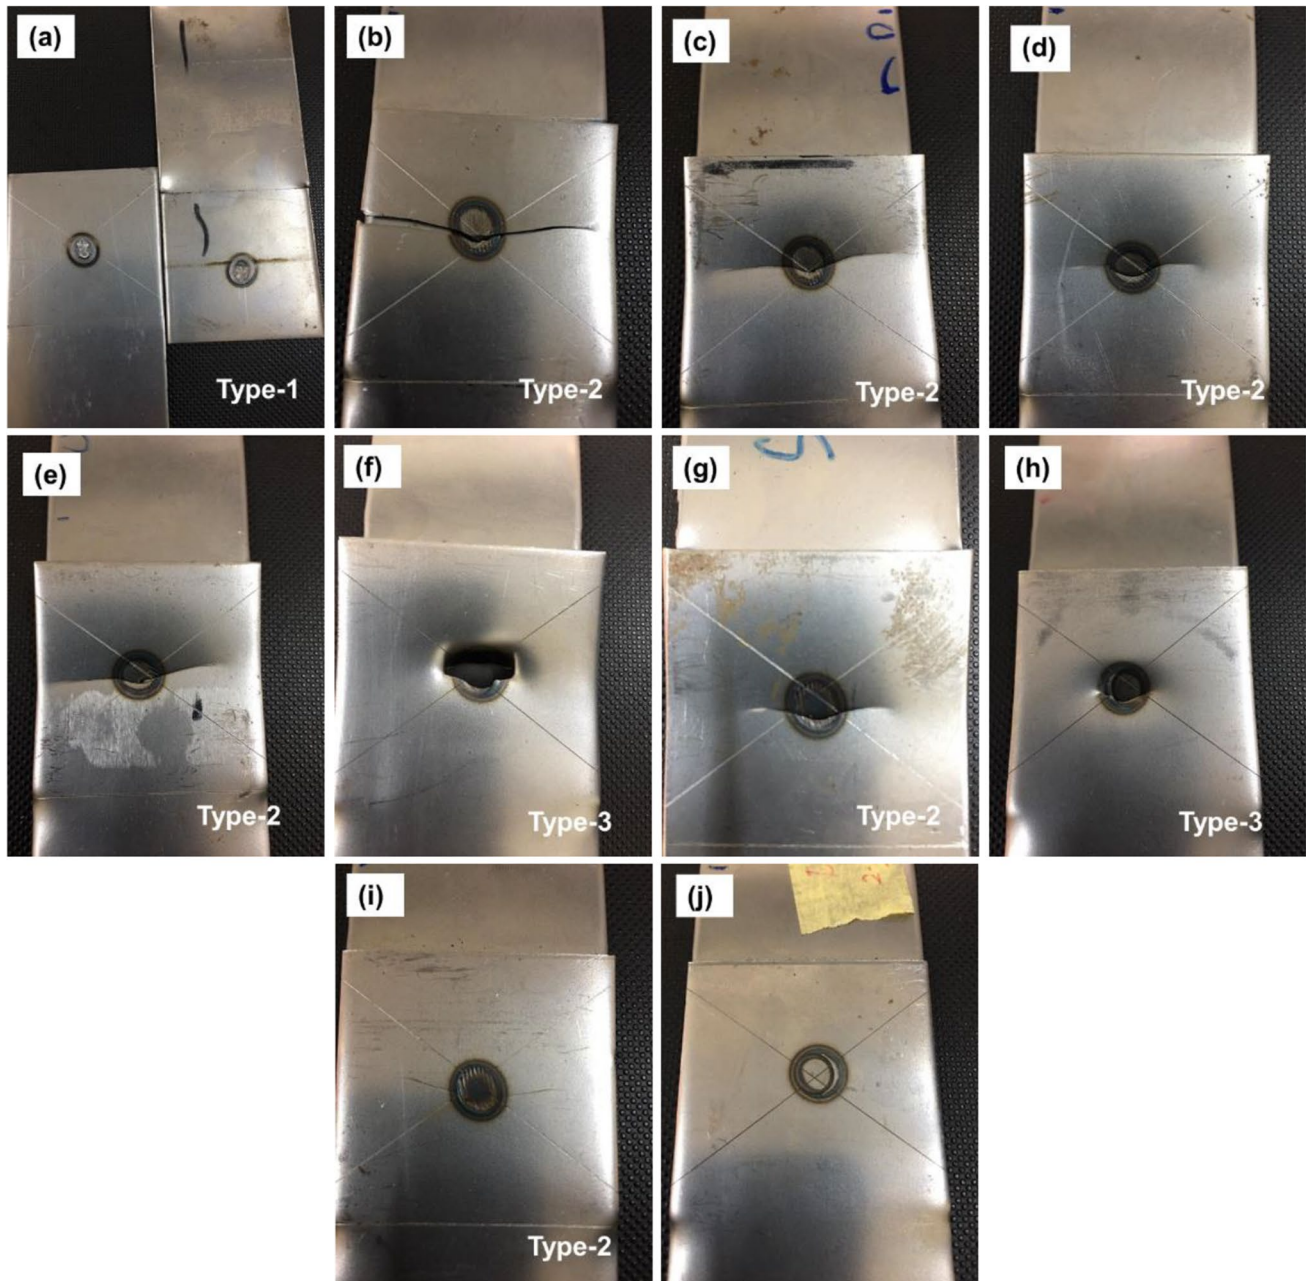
Photographs of welds after fatigue testing (a, c, e, g, i) single pulse welded specimens failed under applied loads of 8.1, 4.6, 3.45, 2.76, 2.3 kN, respectively, and (b, d, f, h) double pulse welded
